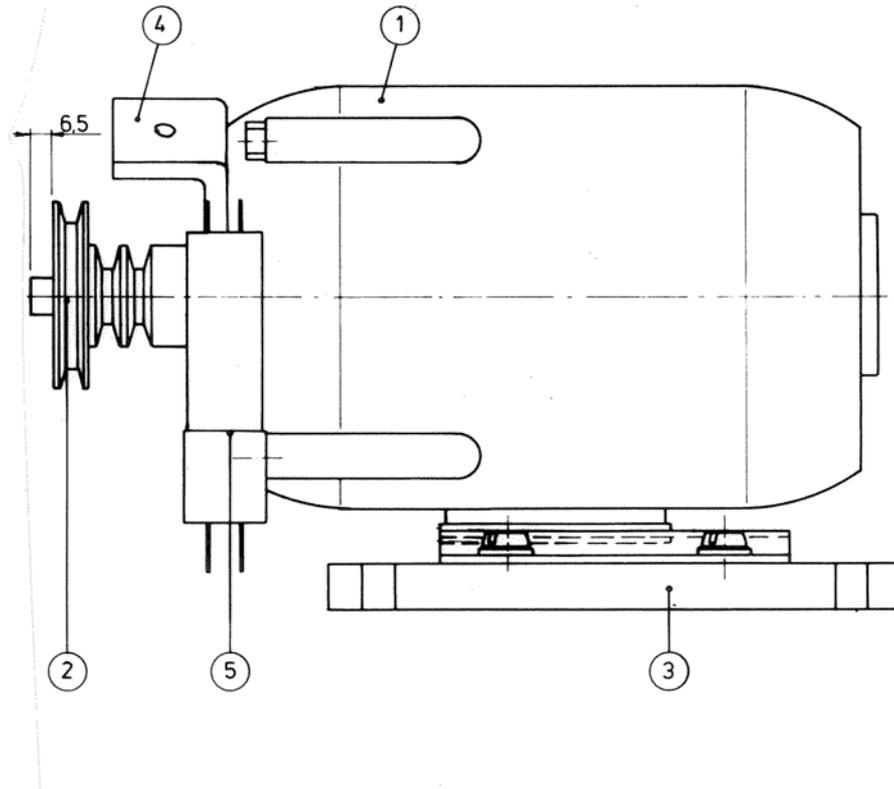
, Accutom-2 back, details, Drawing 14270211A)
